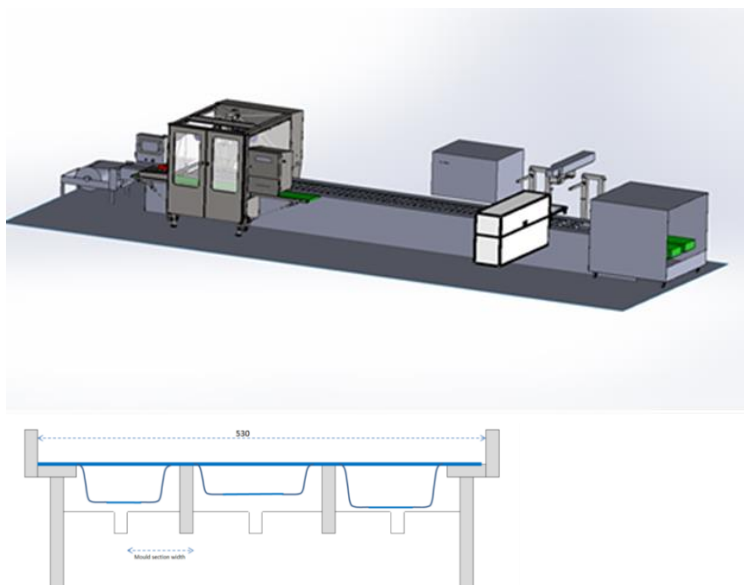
The flexible packaging line with thermo former, sectional frames and end-of-line
